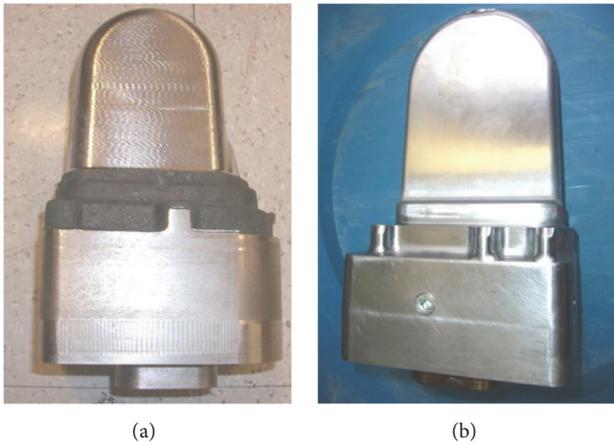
(a) Partial machined part with contact skin, (b) finished HPDC core.
